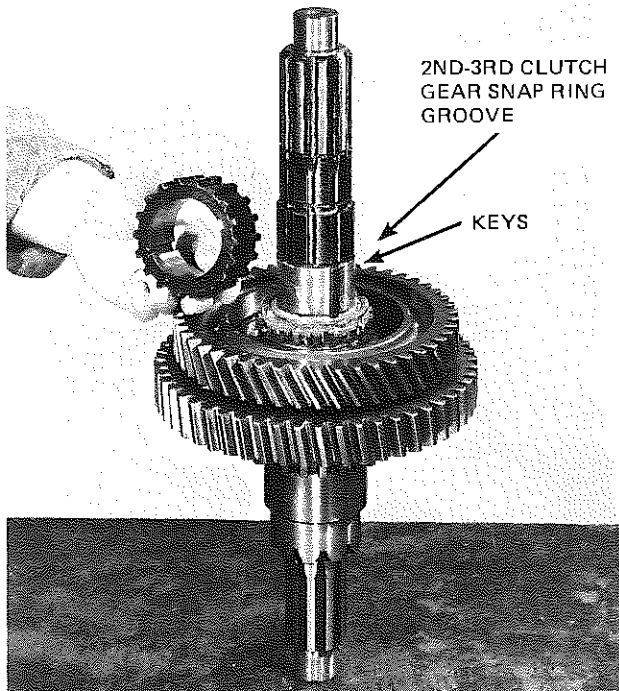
Assembling 2nd-3rd Speed Clutch Gear
